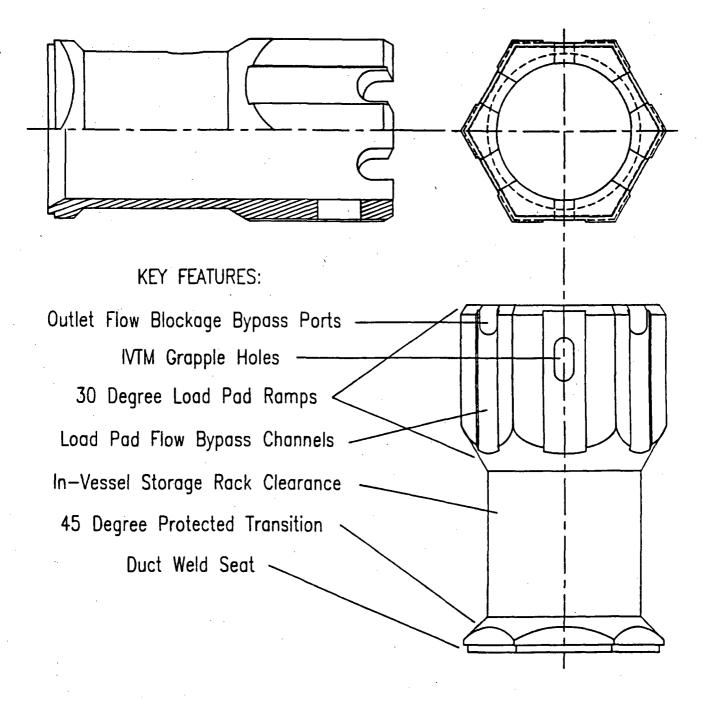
ALMR CORE ASSEMBLY OUTLET DETAIL
